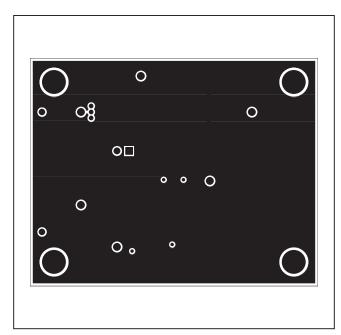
MAX16909 EV Kit PCB Layout—Layer 2
